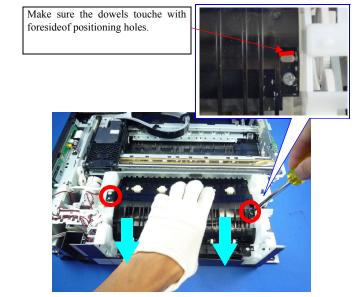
Tighten screw for Lower ASF Paper Guide Assy
